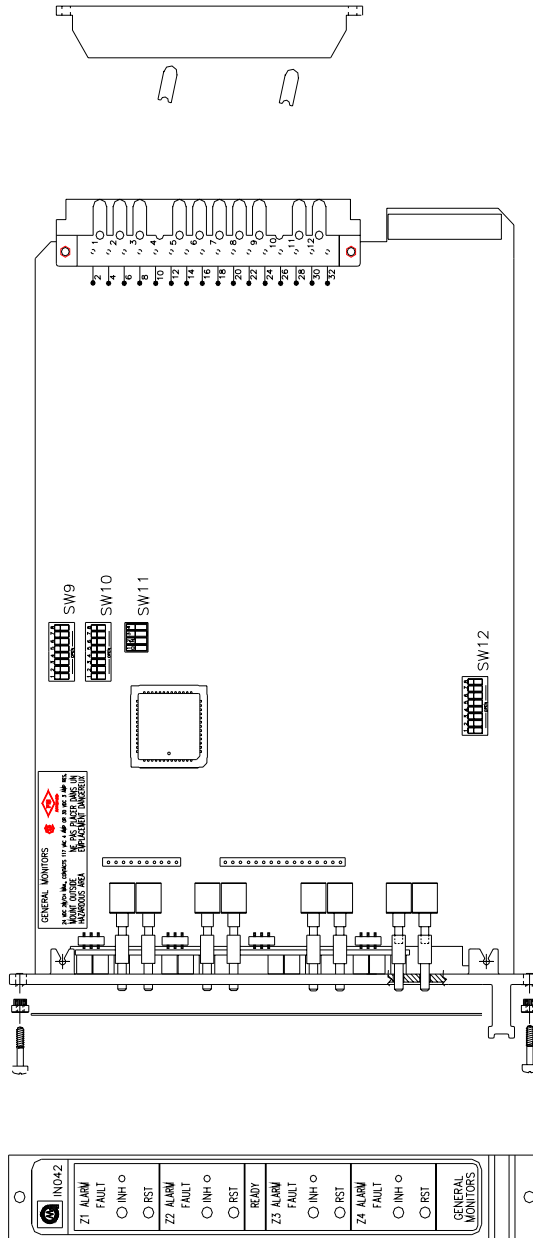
Outline & Terminal Connection Diagram IN042
